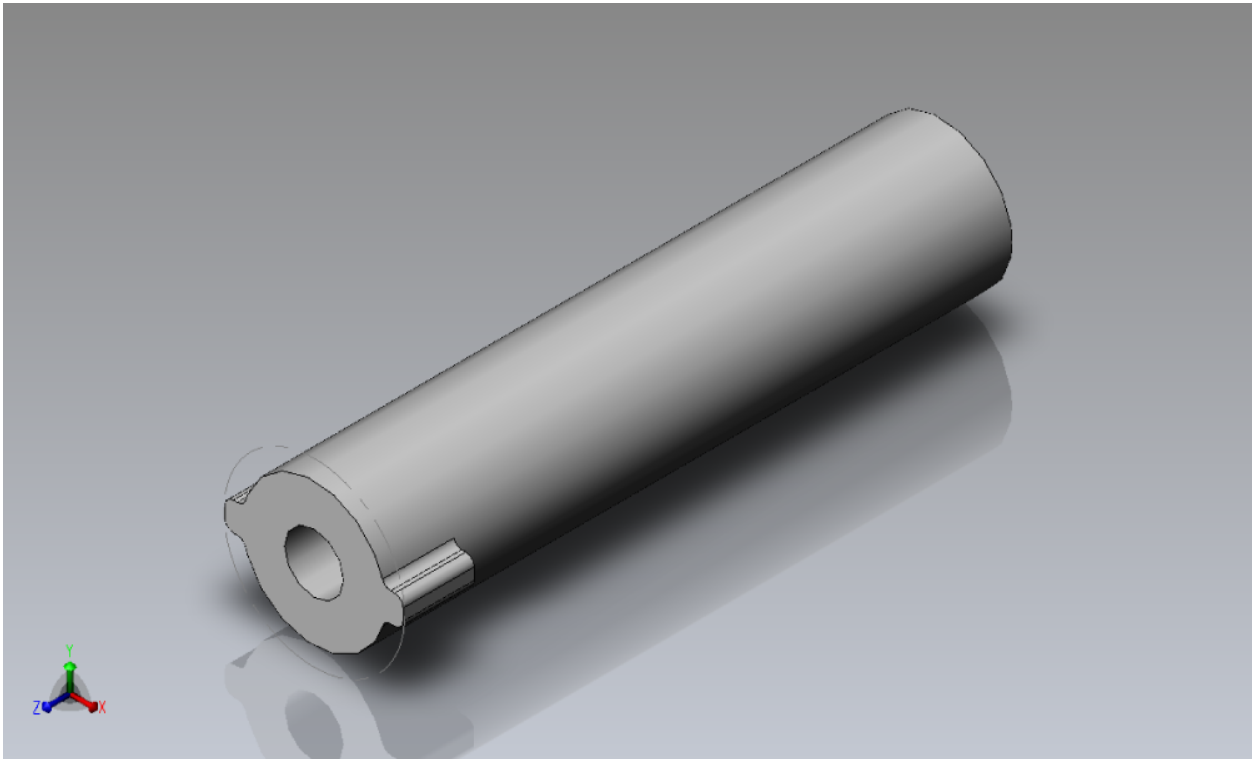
3D view of inner electrode body piece (upper end in front). Two lugs (at 180° to each other) securely fit into locking slots of the inner electrode body piece (see Figures S2.1 and S2.3).
